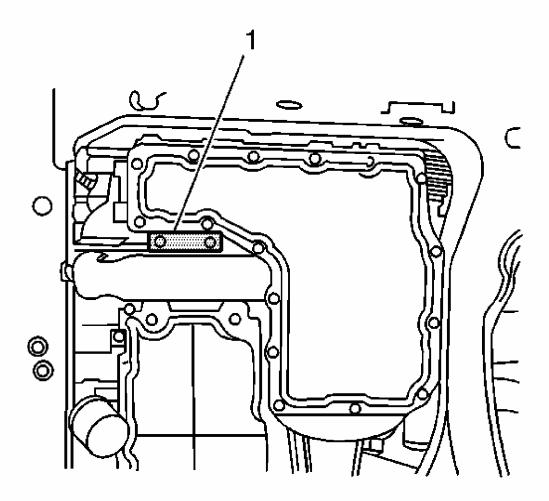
Locating Flywheel Holder J 44214 Courtesy of GENERAL MOTORS CORP.
